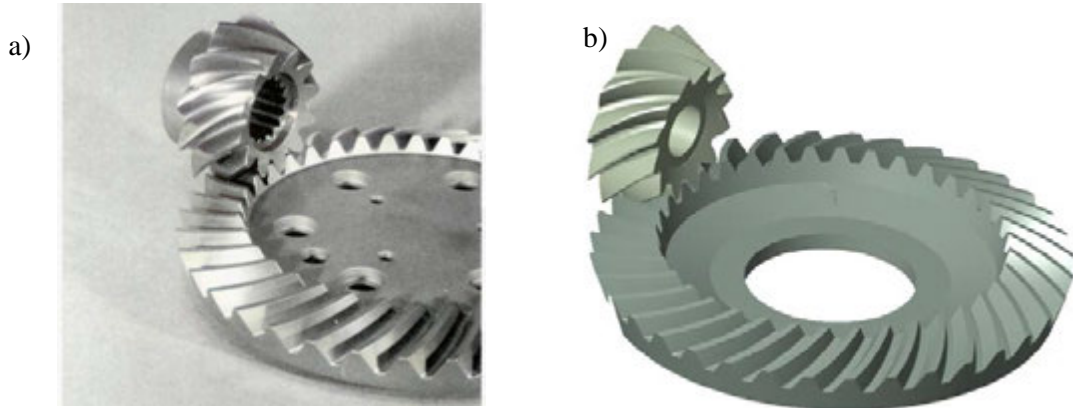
Spiral bevel gear and pinion, a) the test specimen of the NASA Spiral Bevel Gear Rig [28], b) finite element model (Ansol Calyx)
